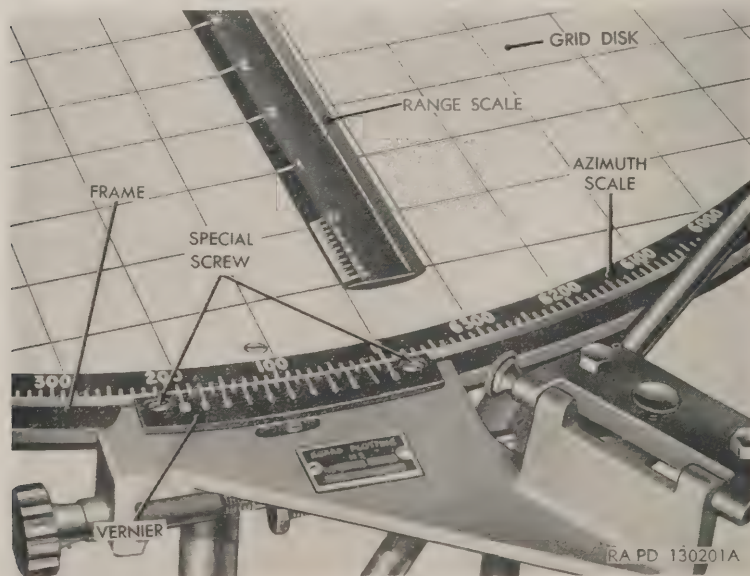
Vernier in adjusted position—plotting board M5 or M5A2.
